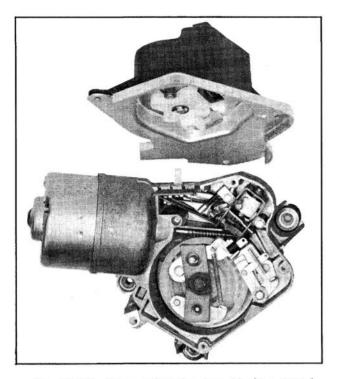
Wiper and Washer Assembly (Two-Speed)
